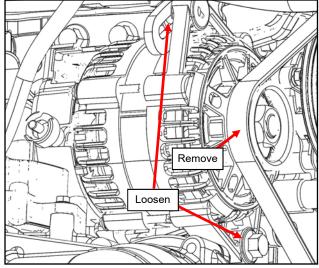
(Loosen Alt Hardware & Remove Belt)
